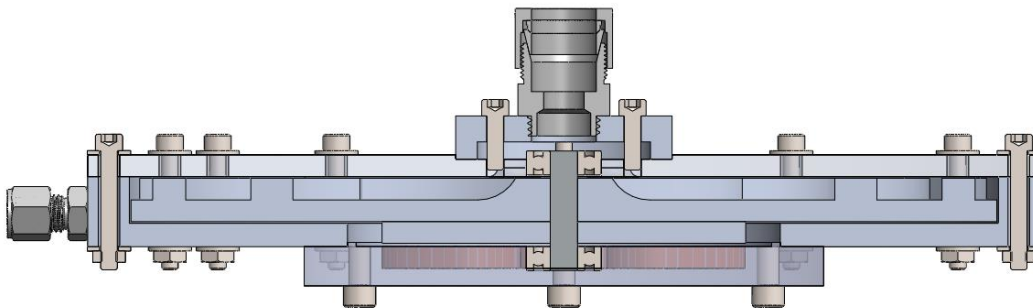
Schematic View of Magnetic Gearbox [27]
